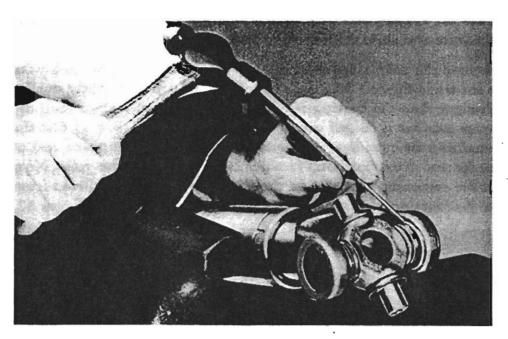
Removing Snap Ring from Round Type Retainer (Mechanics Universal Joint Shown).
